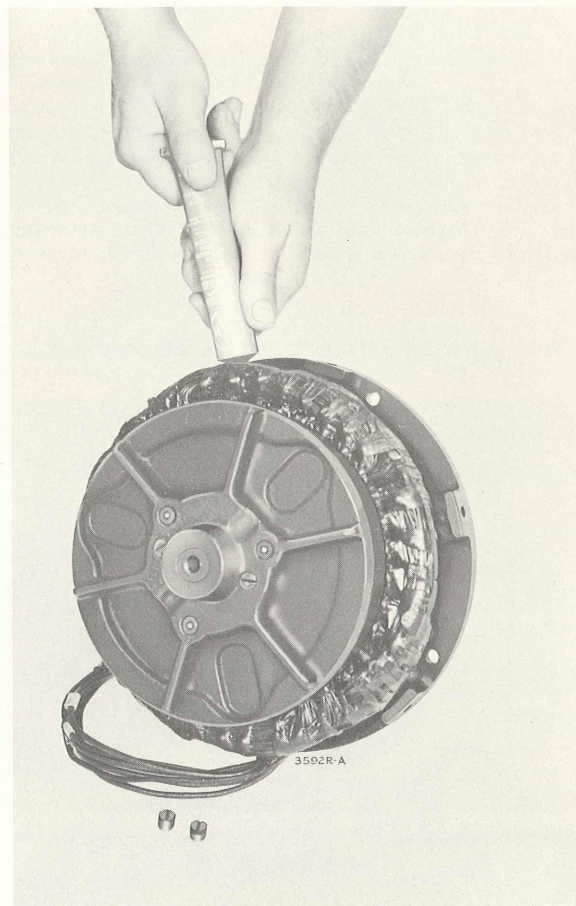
Method of Lubricating Stator Bearing. Plugs Removed from Both Lubrication Fittings
